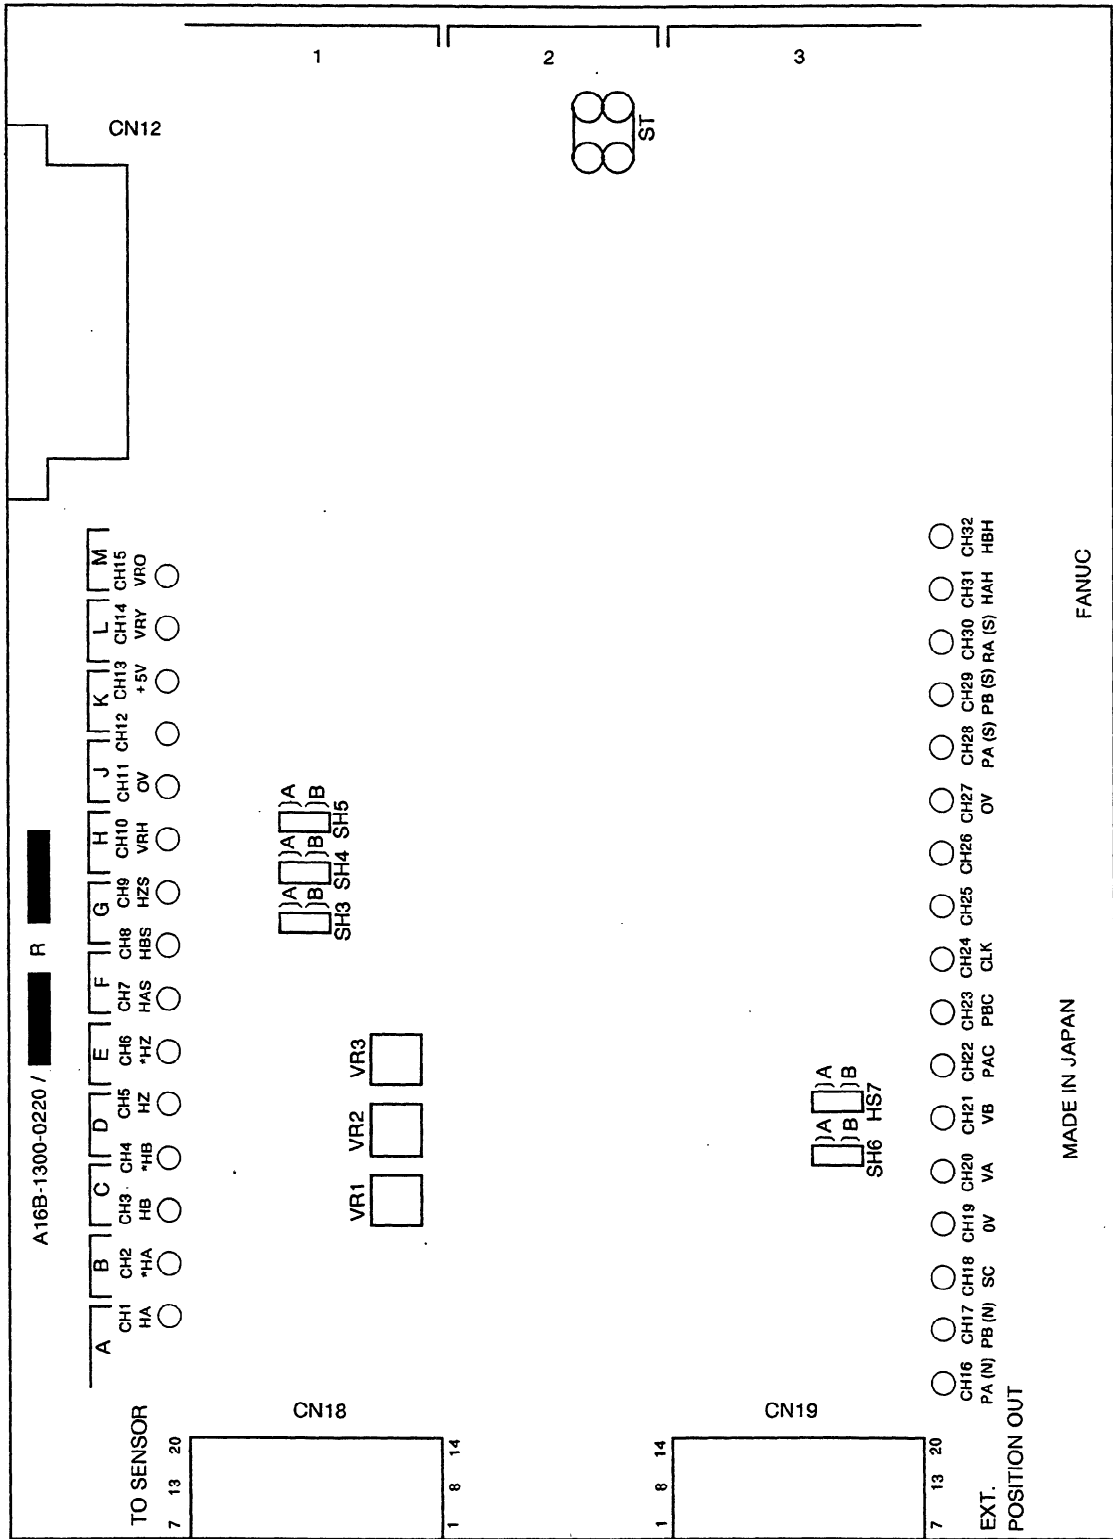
(e) Mounting Positions of Jumpers, Variable Resistors, and Test Points (PCB drawing No.: A16B-1600-0220)
